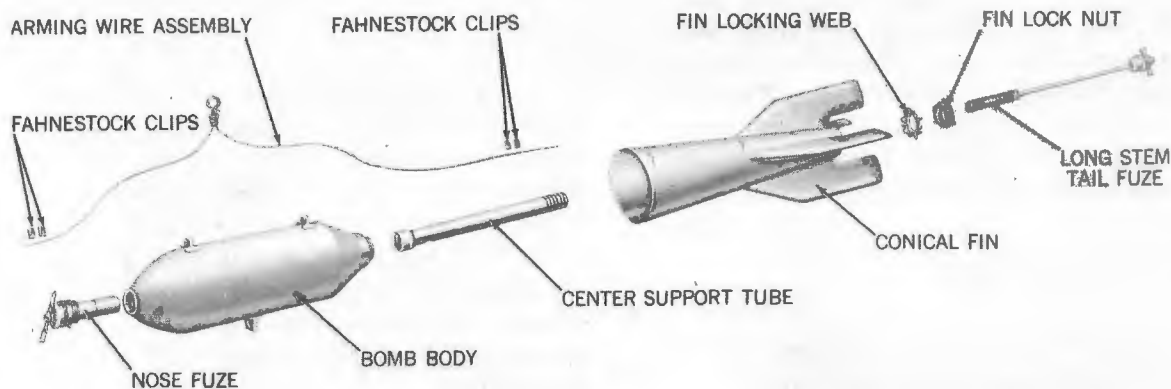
100-lb GP Bomb AN-M30A1 with Fin Assembly M135, Exploded View.
